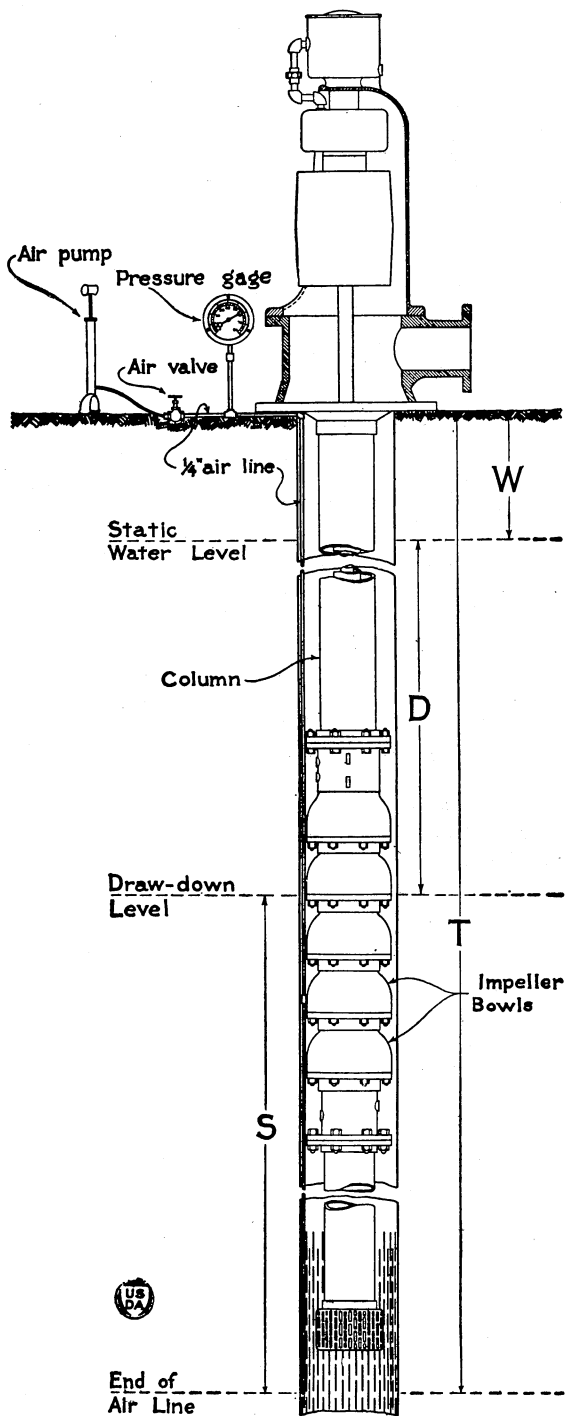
Belt-driven deep-well turbine pump, showing apparatus for determining draw down.
